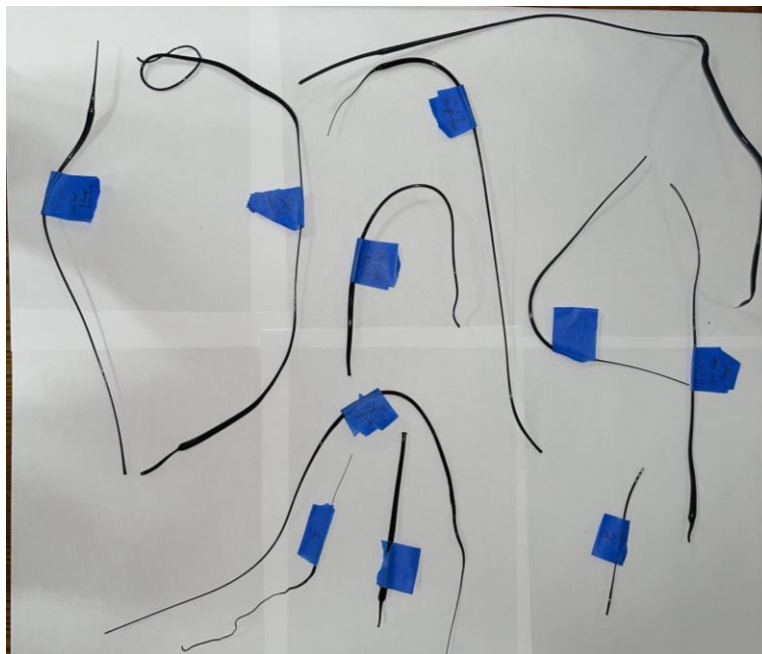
Extrusion Test 3 Filament Samples, each extruded with different parameters.
